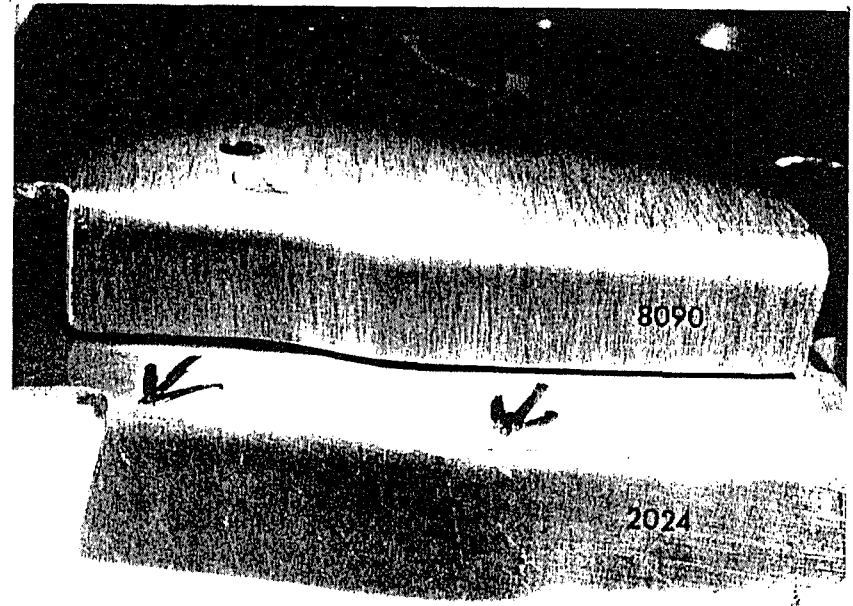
Detail of formed part in 2.3 mm thick sheet. Forming crack appears in 2024-W.
